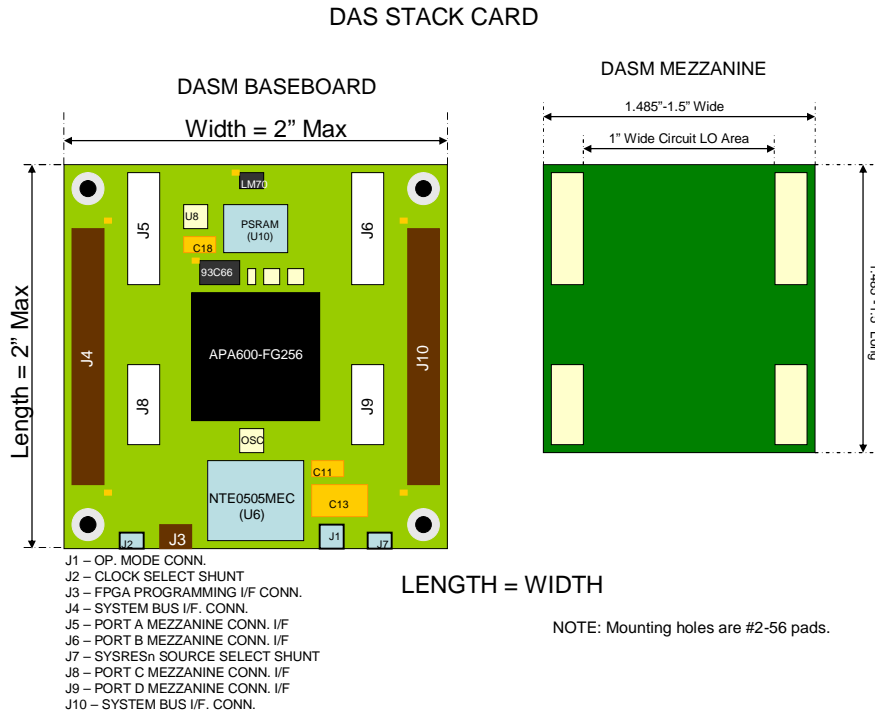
Example layout illustration, showing major components, including mezzanine board, only.
